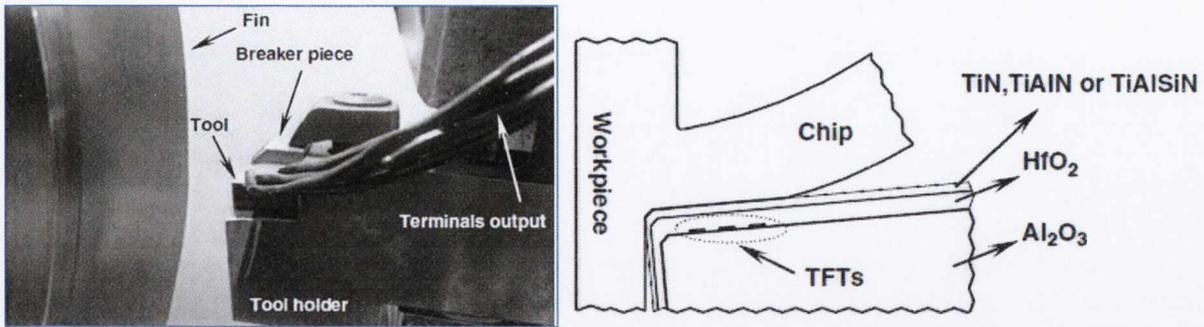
(Left) Experimental setup of the sensed insert and workpiece and (Right) the concept of tool with built in TFT. (Adapted from [123])
